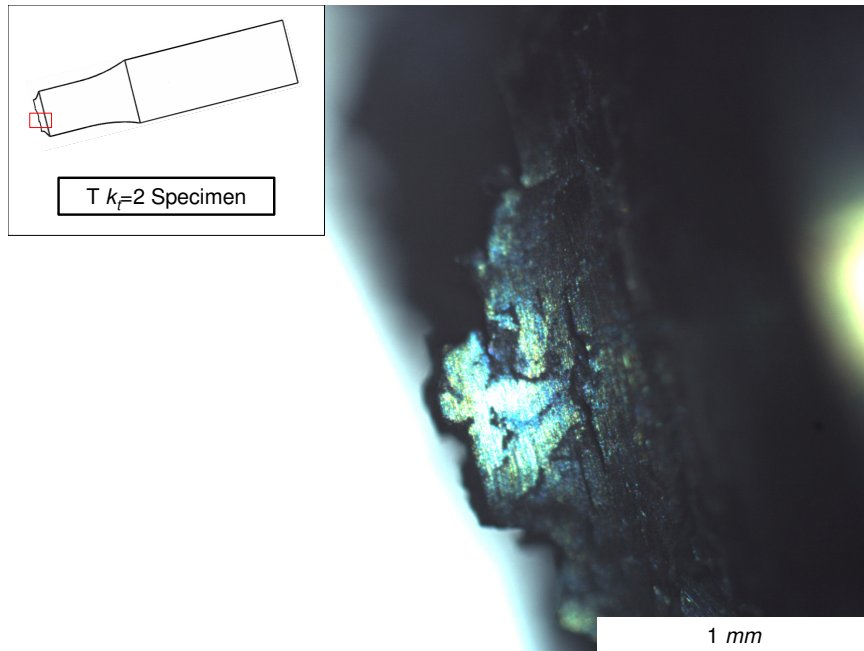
Fracture surface of transverse $k_t=2$ specimen.
